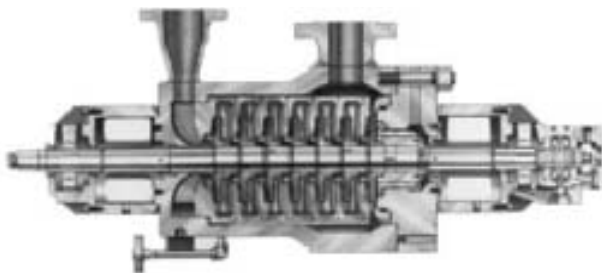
Multistage pump with single-suction impellers facing in one direction and hydraulic balancing device (Flowserve Corporation)
